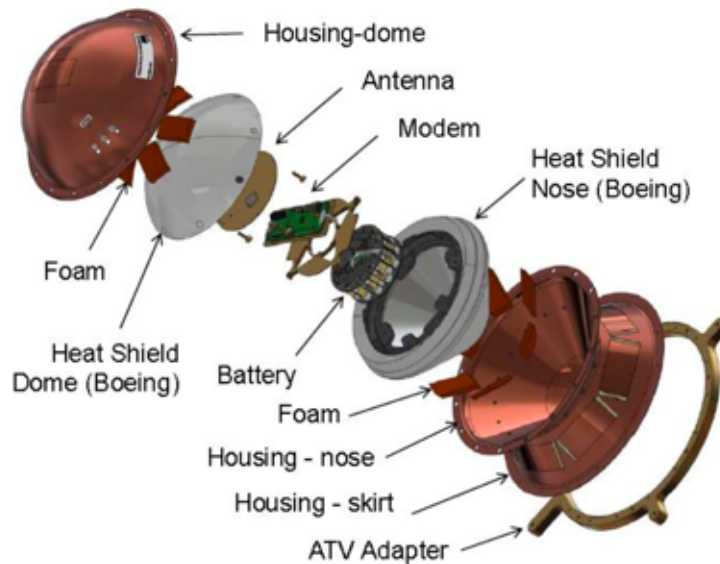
Exploded view of REBR (Image taken from Ref.[6])
